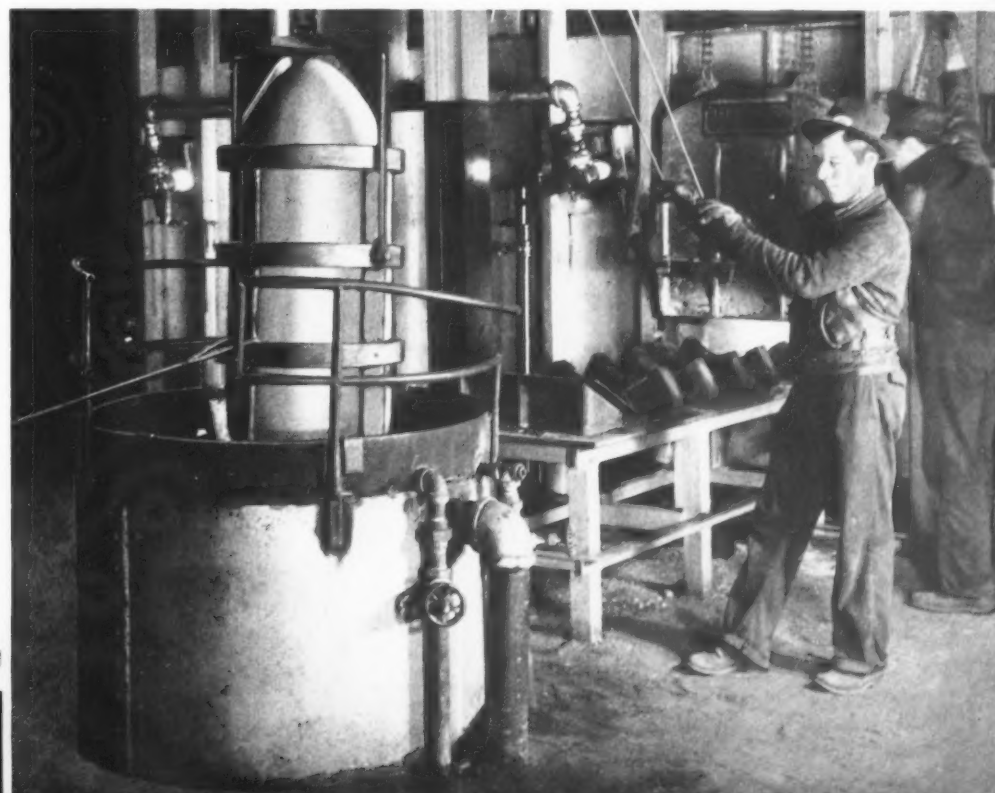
Welding Suspension Lugs on the Side of a Bomb by Oxy-acetylene Method after Hardening and before Tempering
